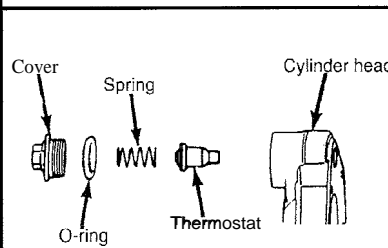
Exploded view of the thermostat assembly-75-175hp (1726/2589cc) 60LV4/V6 motors (except FFI V6 without hard fuel rails)
